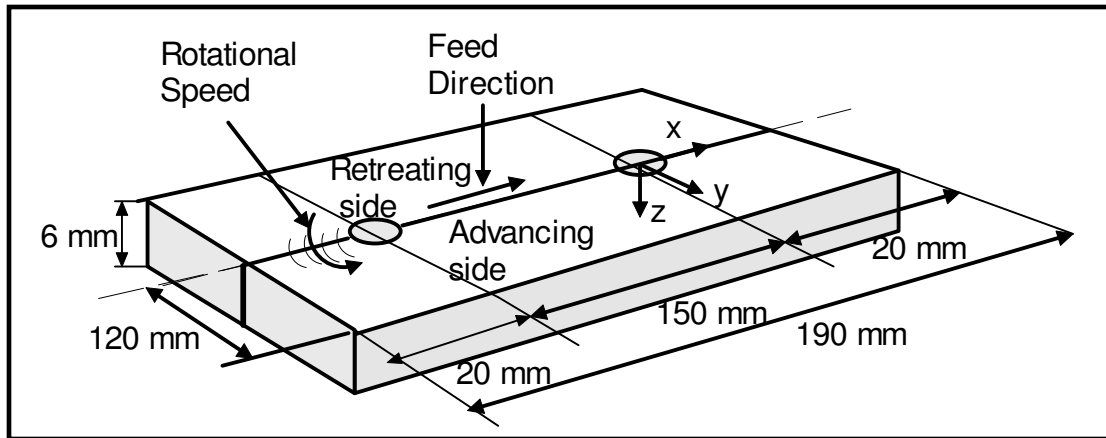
The nominal sizes and basic layout of the FSW welds.
